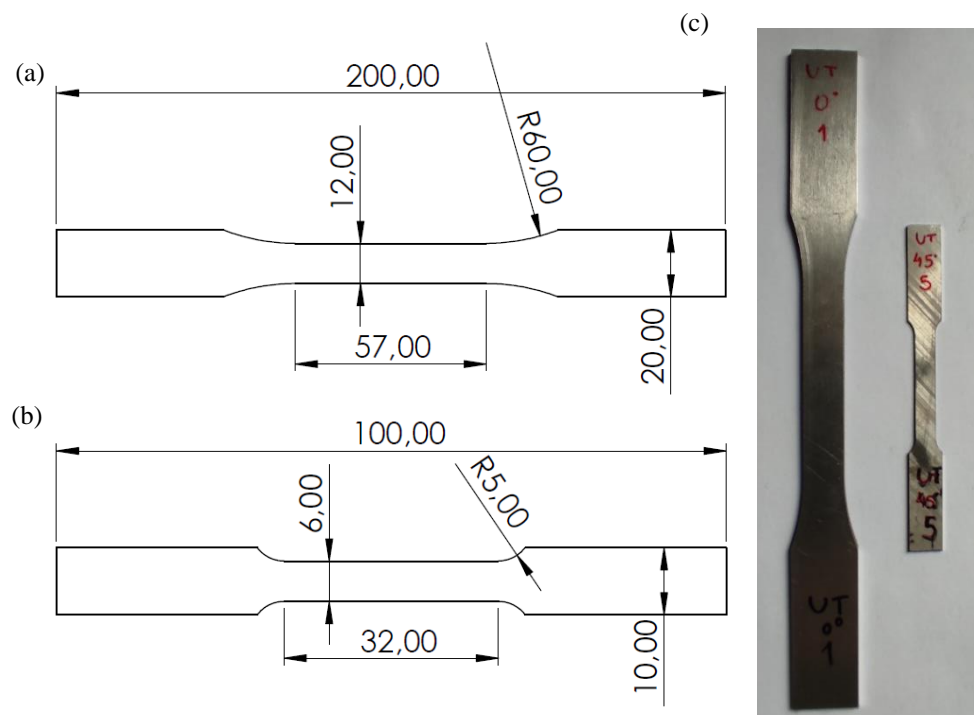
Dimensions of the uniaxial tension specimens for (a) AA6082-T4 and (b) AZ31. (c) AA6082-T4 and AZ31 uniaxial tension specimens. Dimensions in mm.
